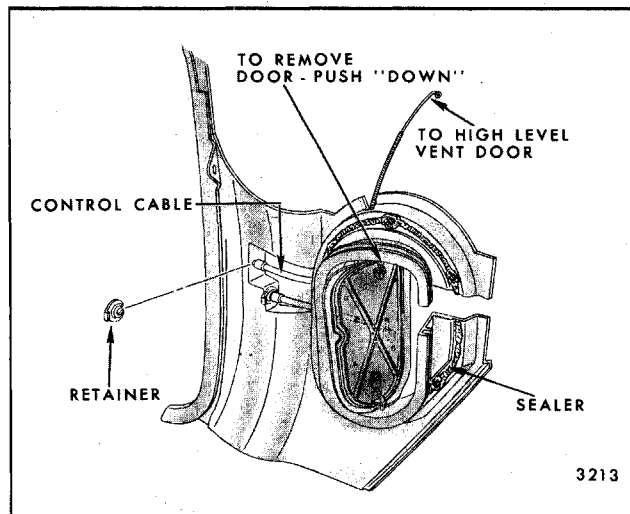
Shroud Side Finishing Panel Sealing - "F,X" Styles Shown - "H" Styles Similar
